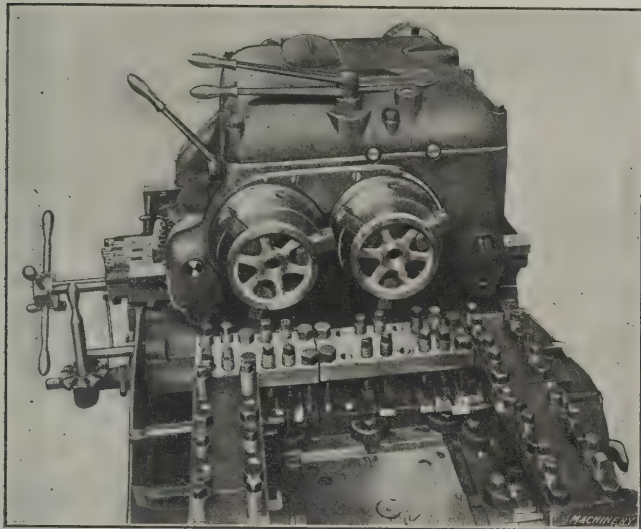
Turret and Head of Double-spindle Turret Lathe
